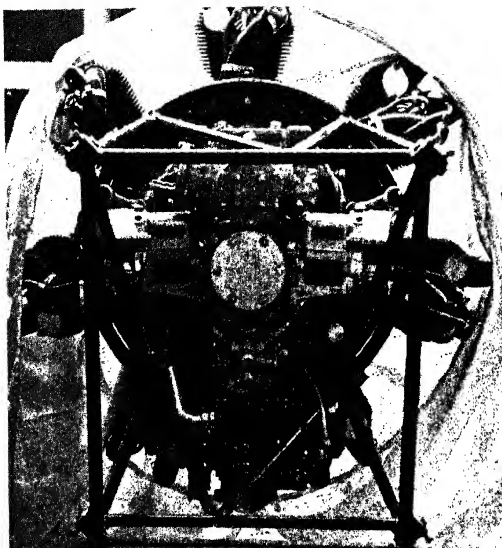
ENGINE IN FLEXIBLE MOUNTING.
